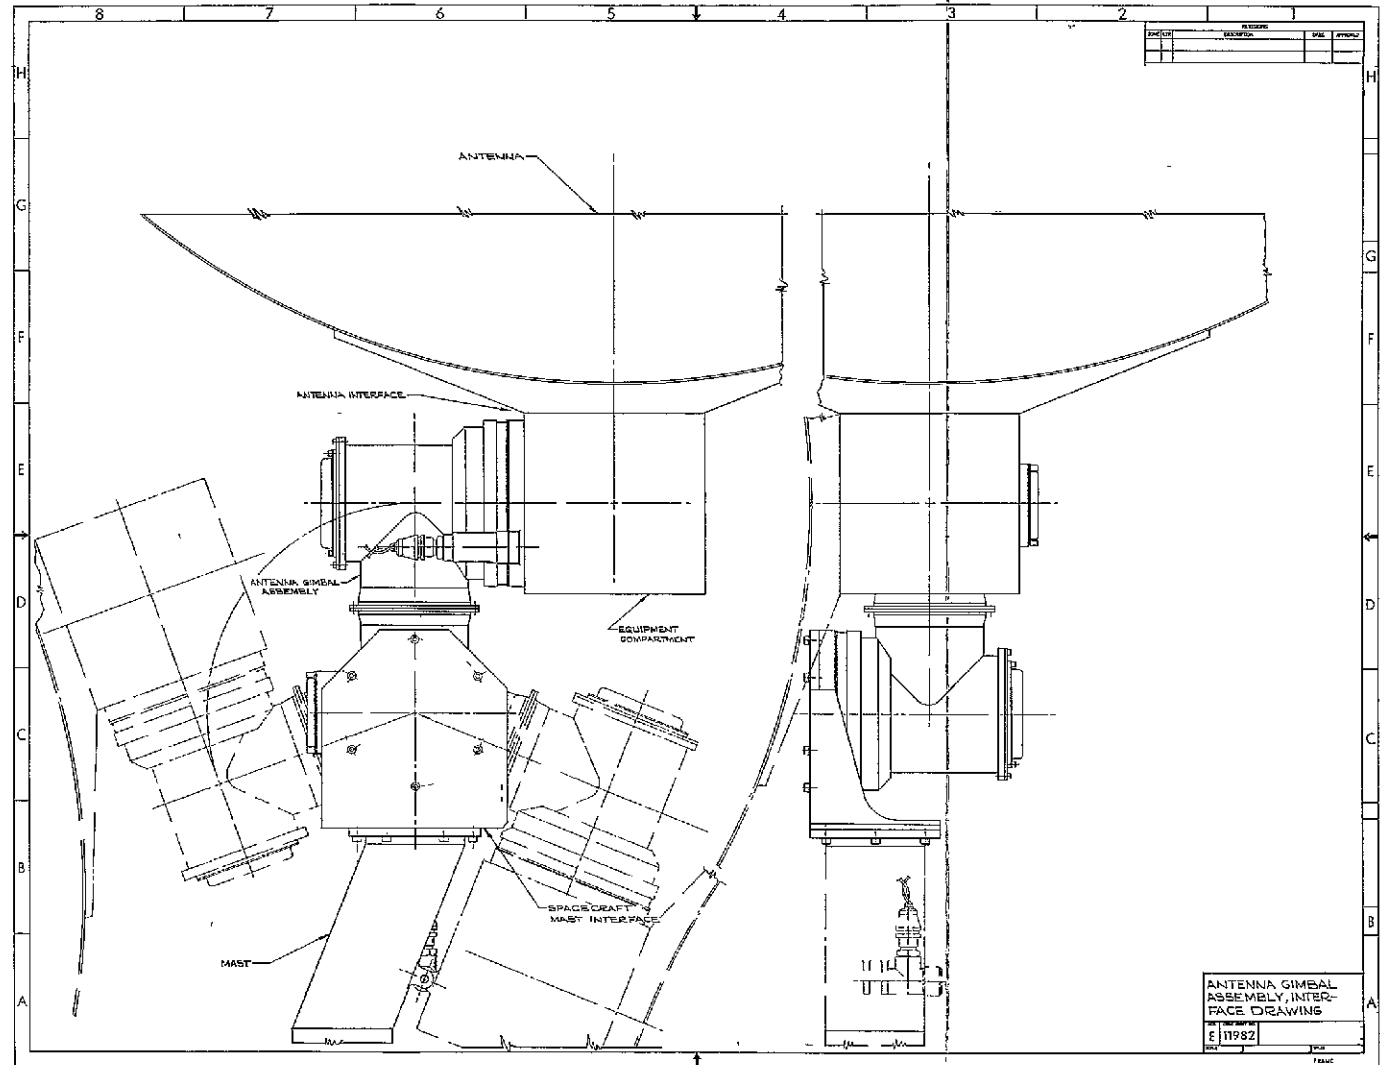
Antenna Gimbal Assembly Interface Drawing
